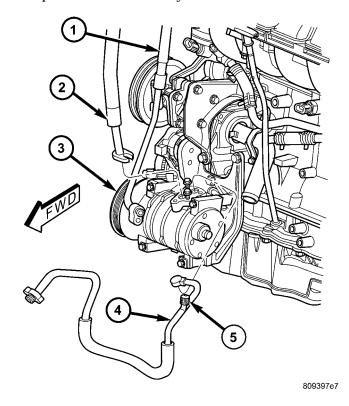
A/C REFRIGERANT LINES - COMPRESS
